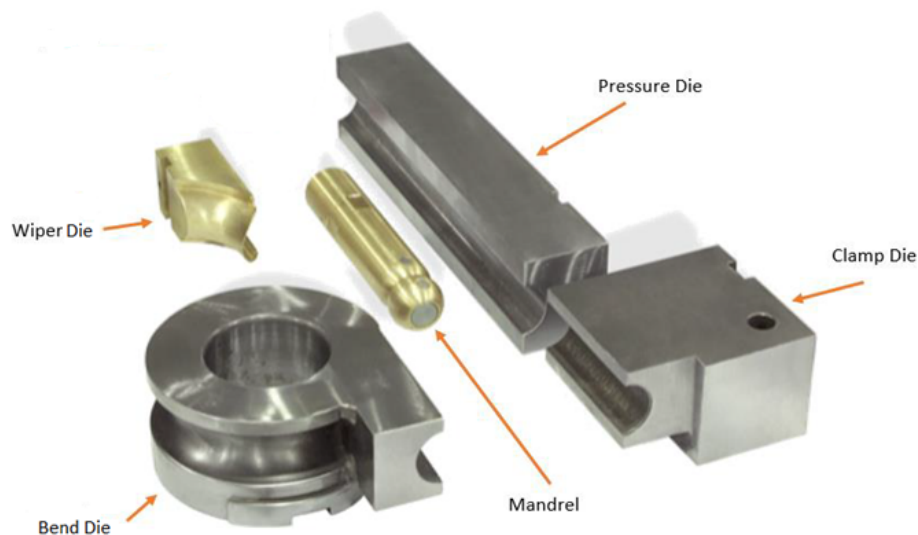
Main parts of a rotary draw bending machine responsible for forming the tube (AMOB, b) adapted
